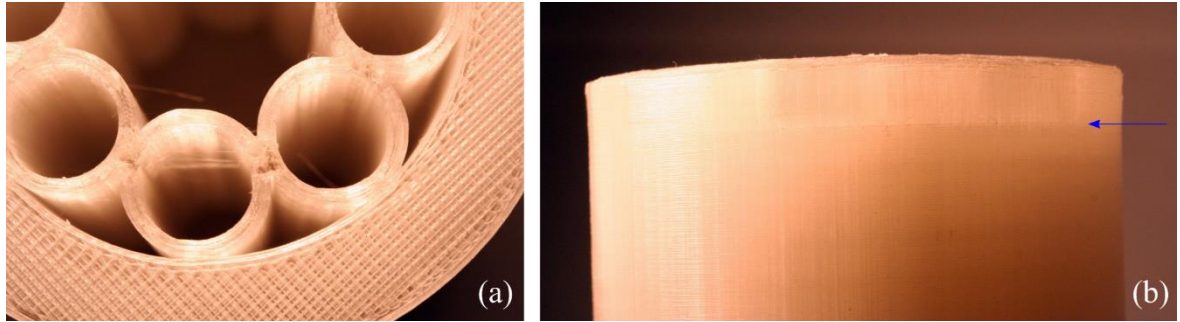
Photographs of the HC PC preform printed according to the new design. (a) Top view, accentuating sound connection between adjacent capillaries. (b) Side view of the bottom end of the preform, showing warp of the bottom surface and a crack in the side wall (marked with an arrow). Note higher transparency of the preform towards the bottom surface (visible from the marked crack up, see also Section 4.2).
